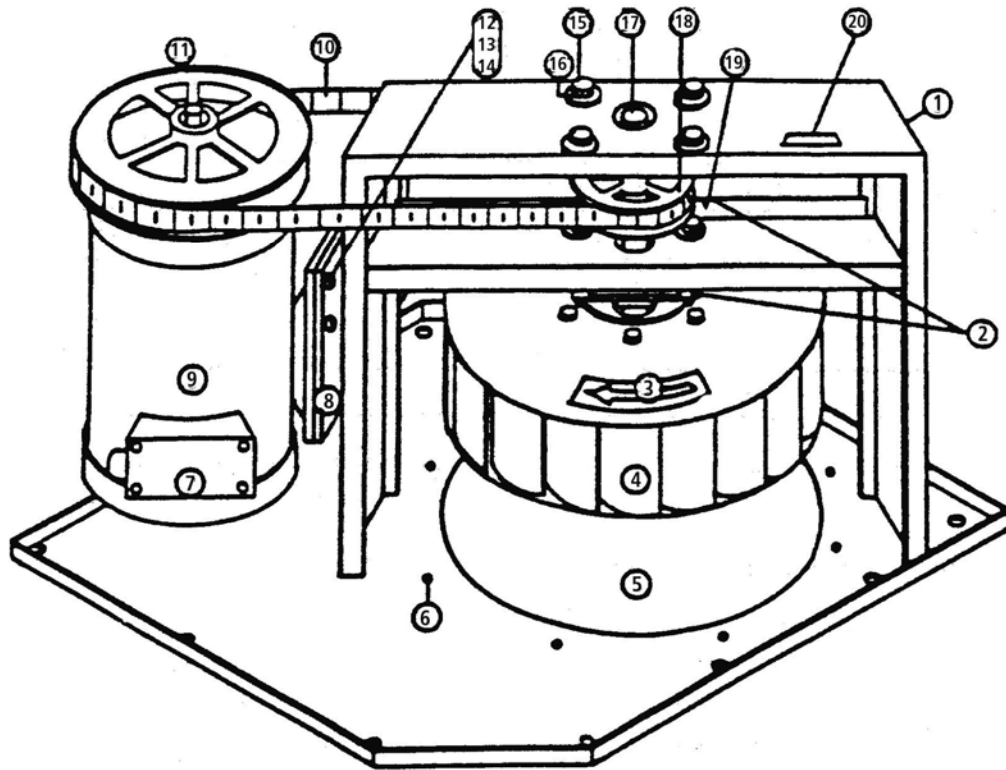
BLOWER ASSEMBLY AND PARTS LIST
